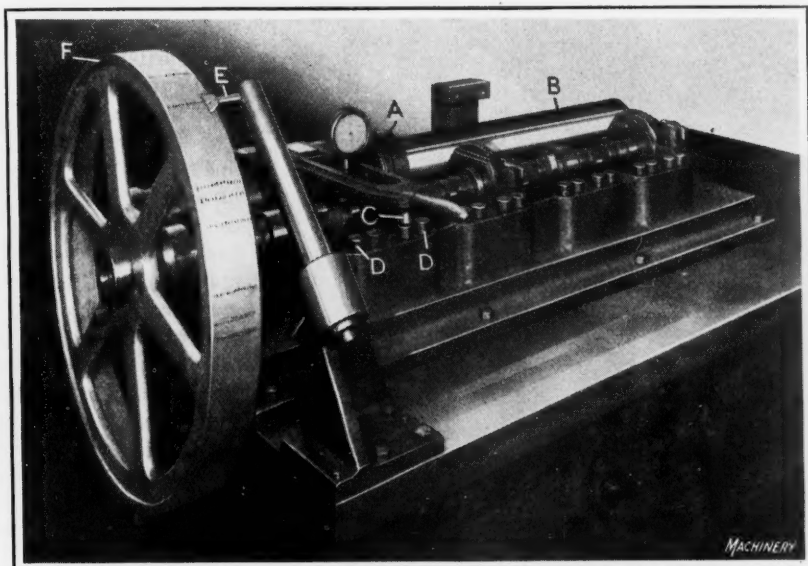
Special Testing Machine used for determining the Accuracy of the Intake and Exhaust Points on all Cams on the Shaft
